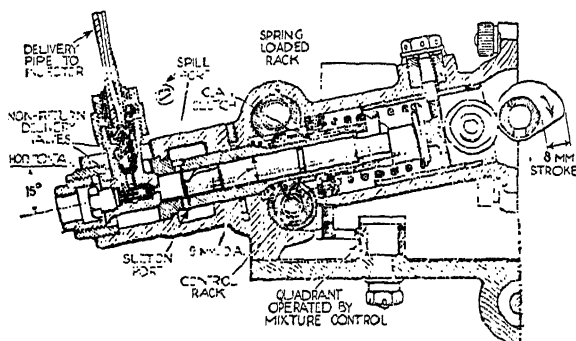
The cam-operated fuel injection pump; twelve separate pumps of this type are employed.
